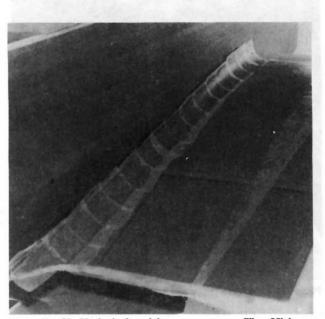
Method of applying wax paper to fillet. Minimum sanding required.
